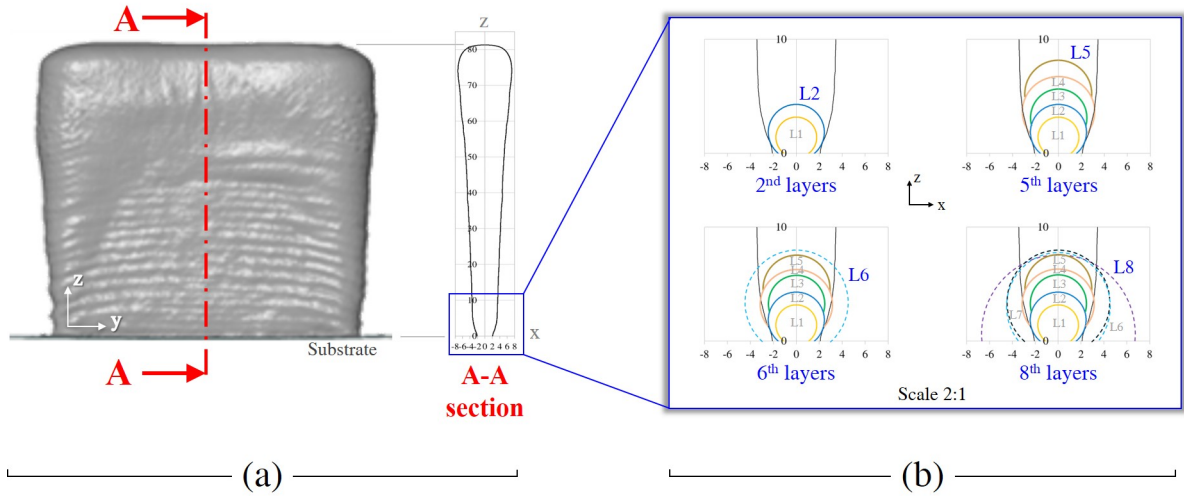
Case study of weld bead cross-sections
